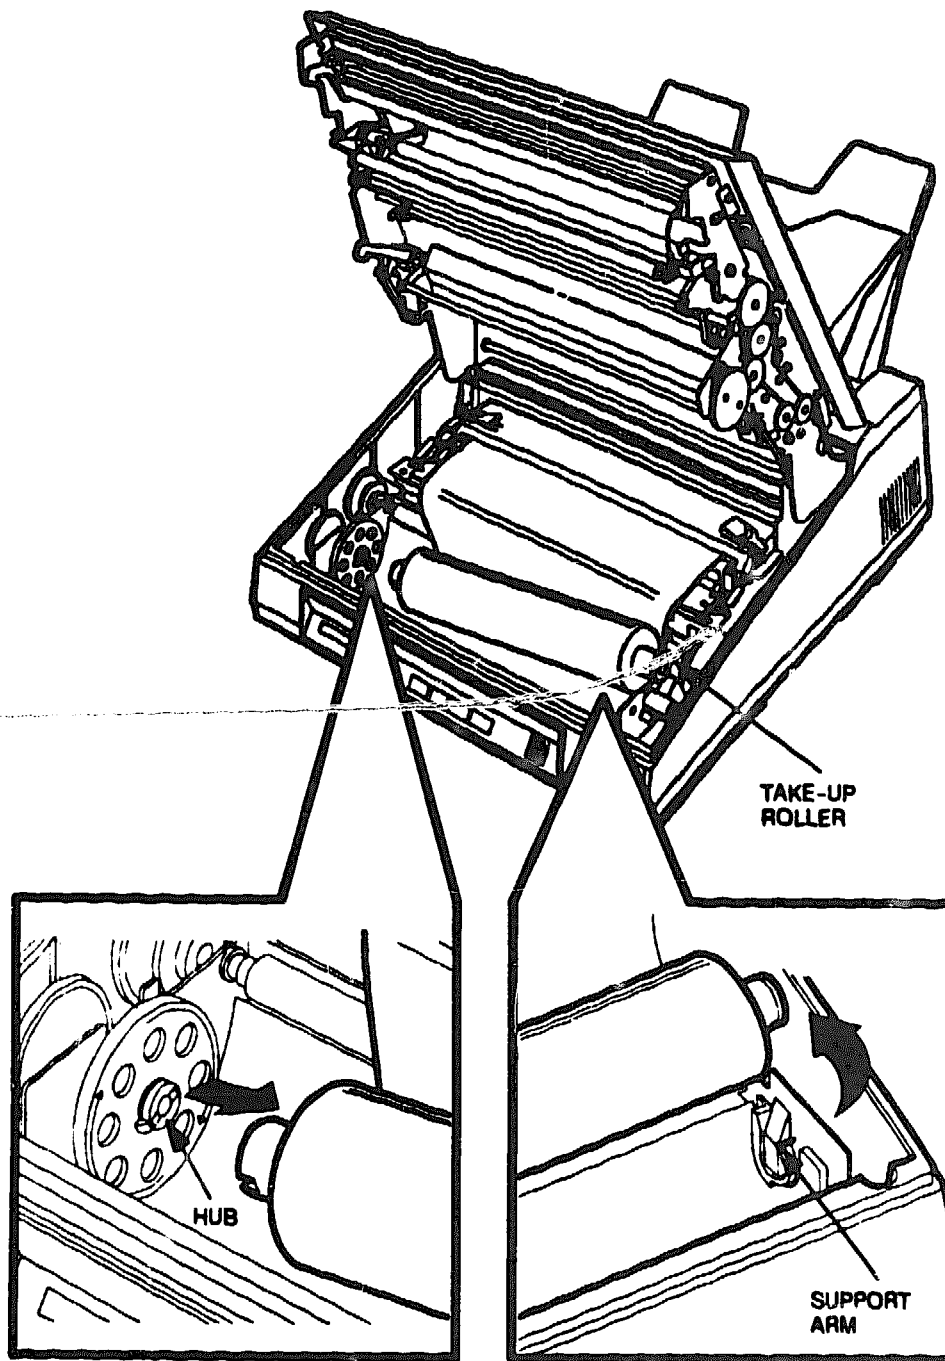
Ribbon Core (Take-up Roller) Removal
